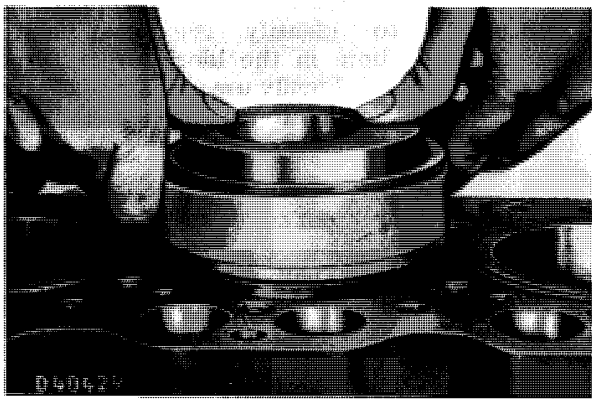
Installing Piston, Using Special Tool 19.58-90.616
